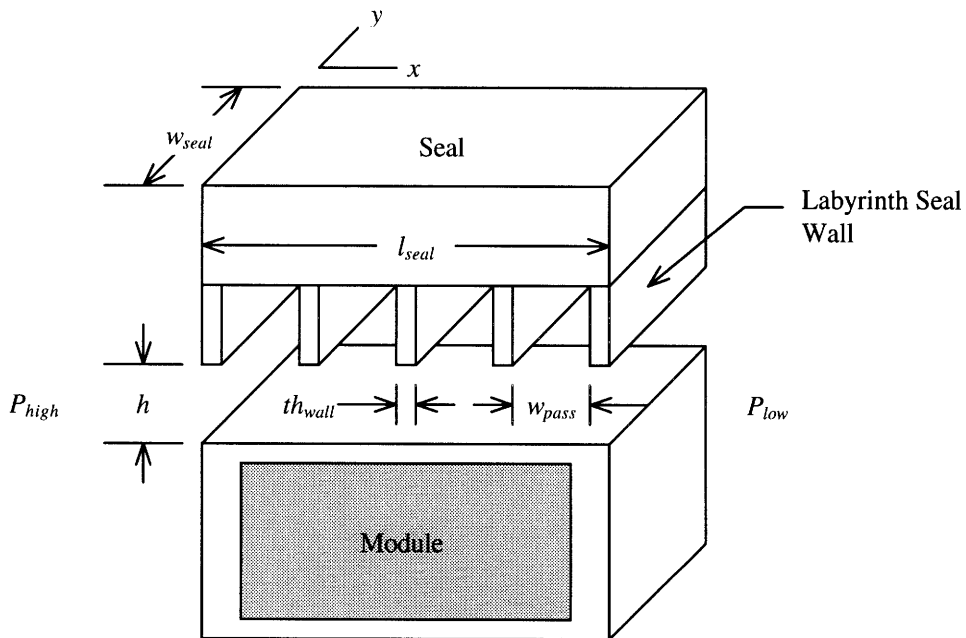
Diagram of seal along the module top and bottom faces showing relevant dimensions.
